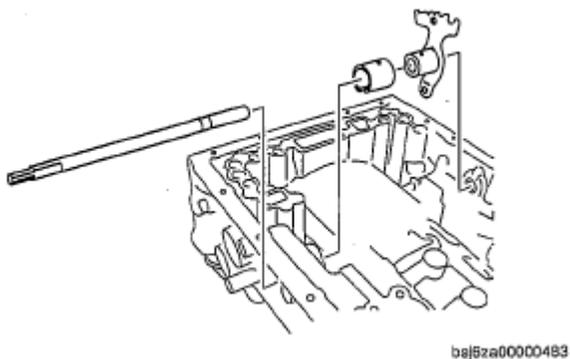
Identifying Manual Shaft Washer And Manual Valve
